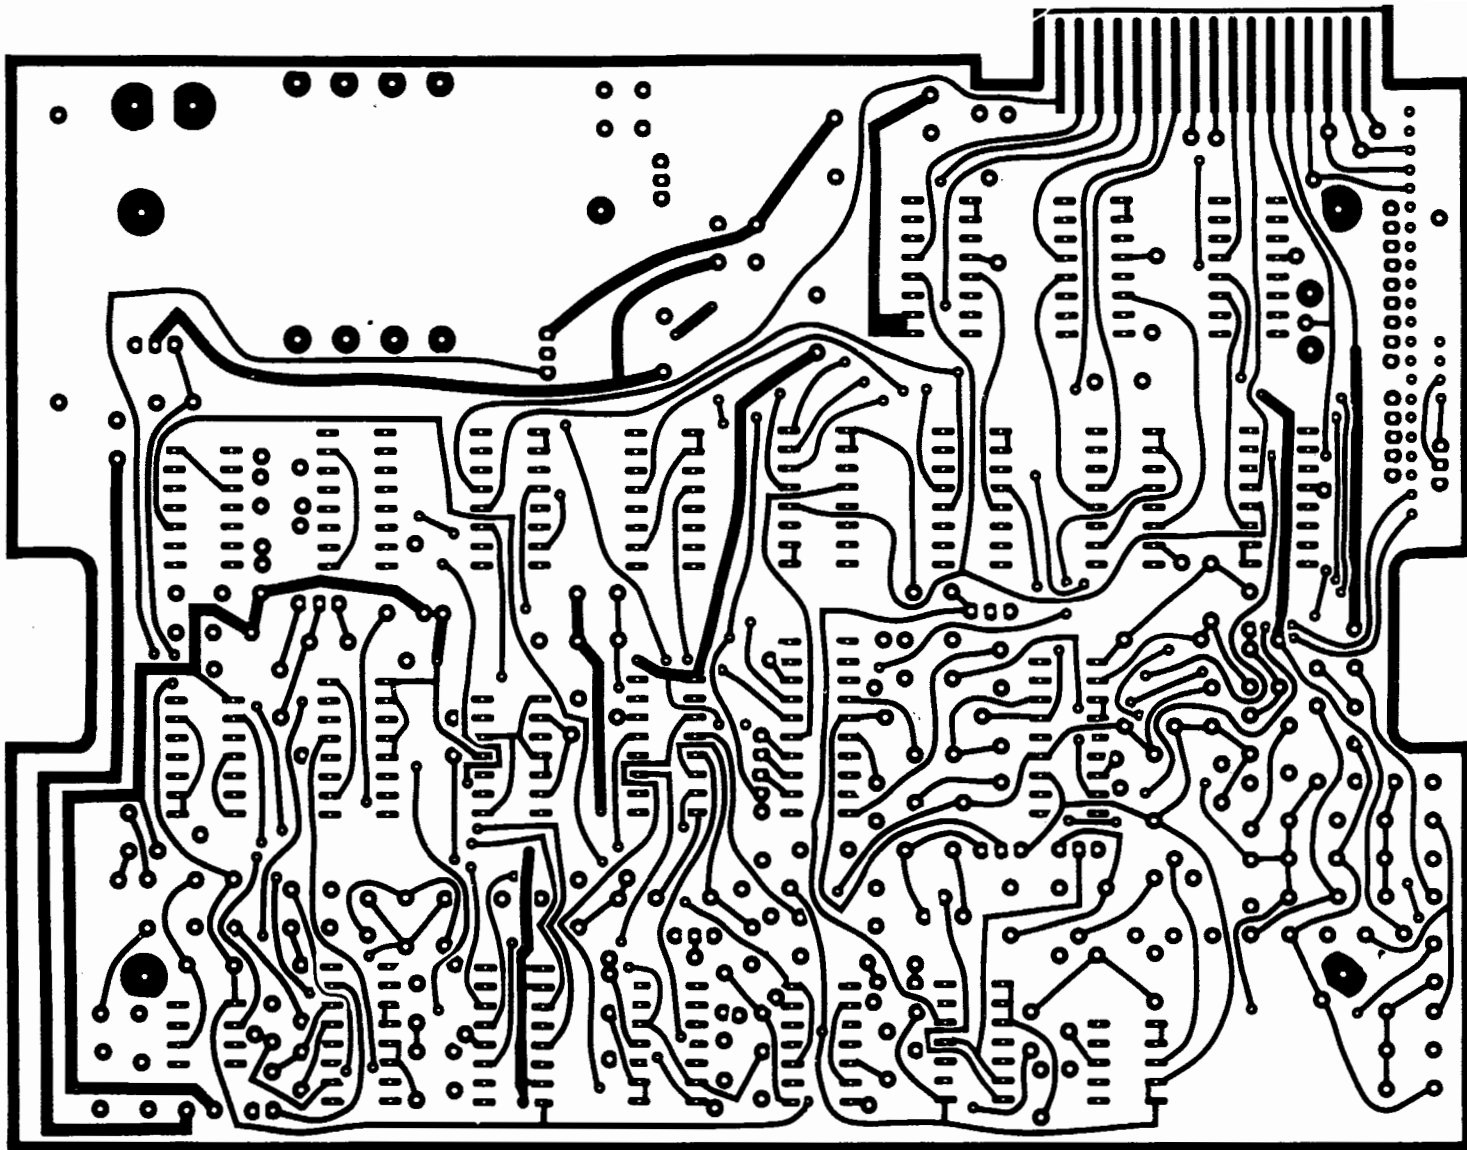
THE COMPONENT SIDE of board A is shown here at half its actual size.
